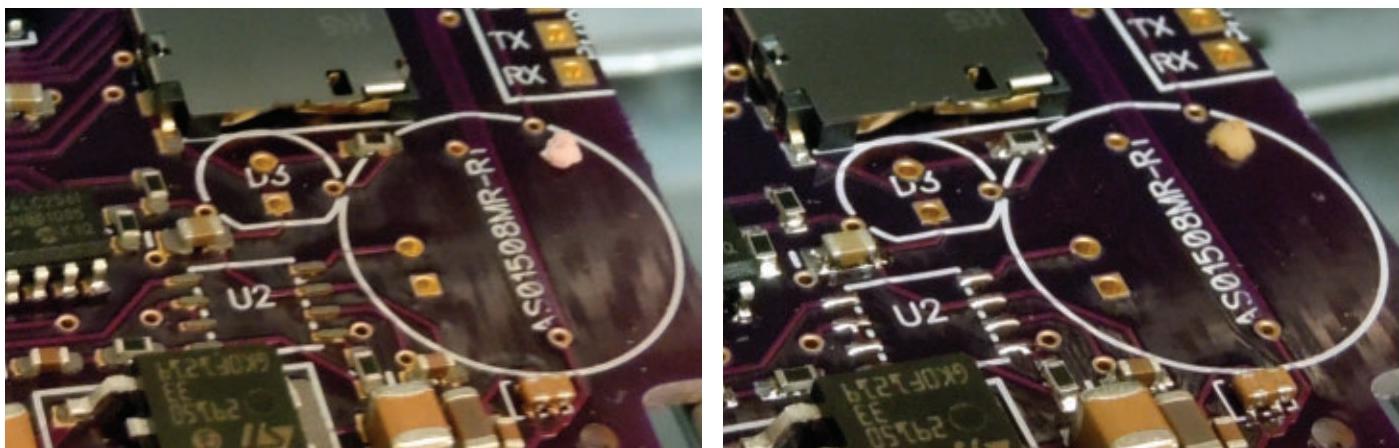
PCB in toaster oven, before and after. Notice how the solder changes from dull gray to shiny silver.
